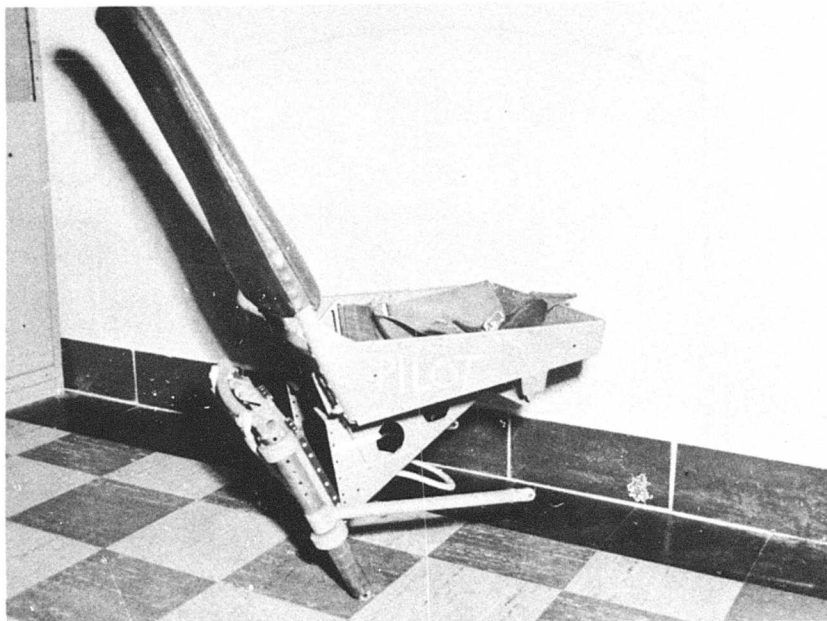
Failure of the pilot's seat pan, due to shearing of the rivets which attach it to the primary support structure (arrow).
